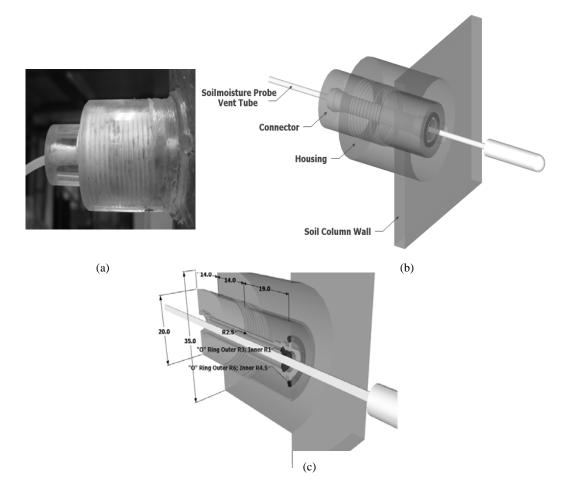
(a) Photo, (b) Three-dimensional sketch, and (c) Cross-sectional view of the tensiometer connector
